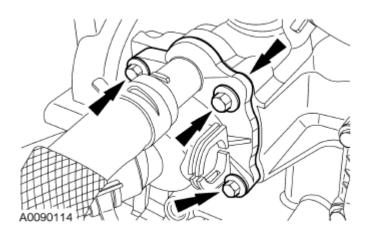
Locating Bolts And Thermostat Housing Assembly Courtesy of FORD MOTOR CO.
